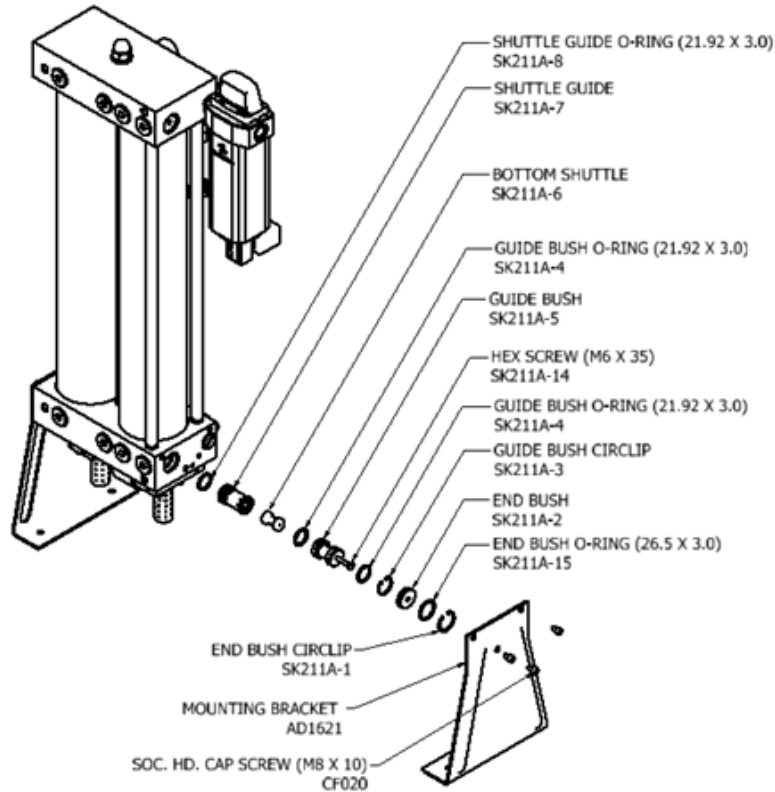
Exploded view of bottom shuttle-Dryspell Plus models 20 and 30
